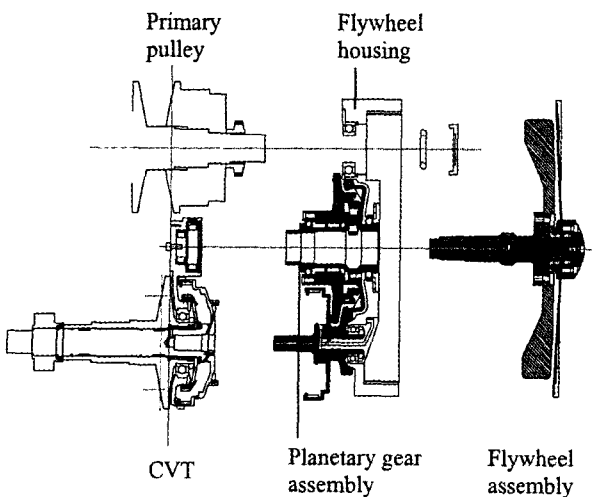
Modular assembly of planetary gear set and flywheel to the CVT.
